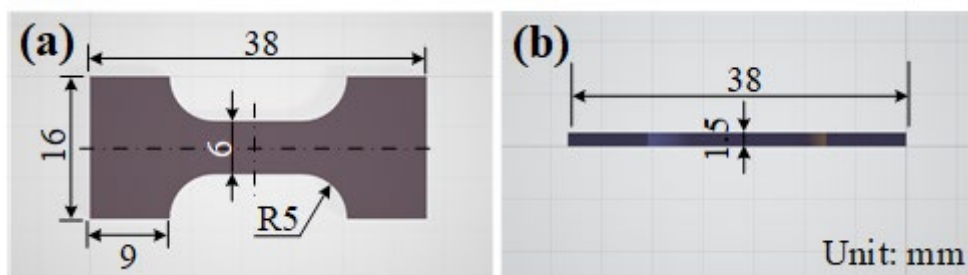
Geometric dimensions of the tensile sample in (a) top view and (b) left side view
